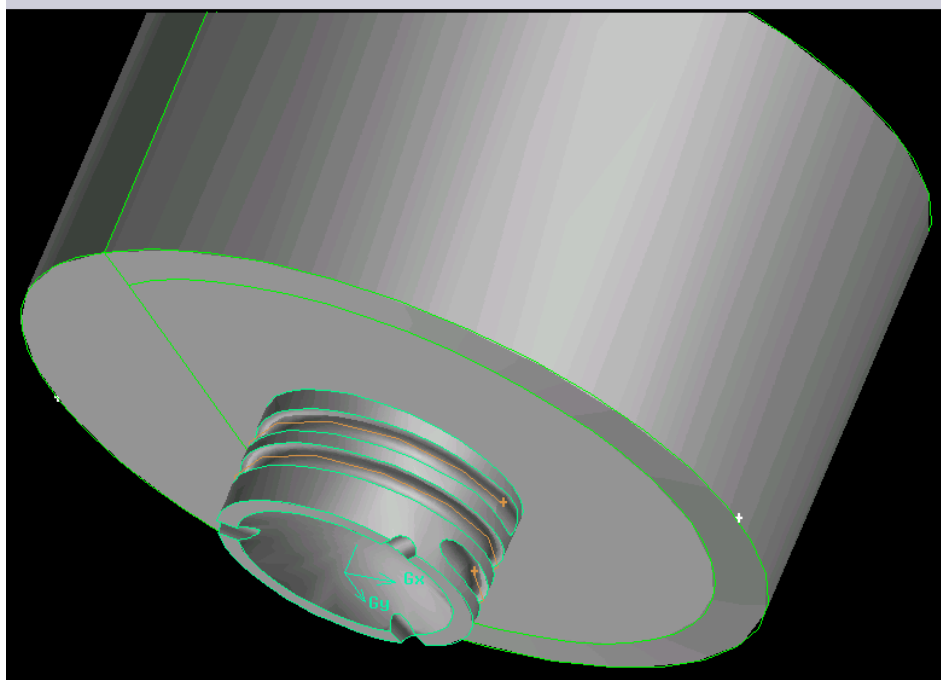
3D geometry of the tool pin created using Gambit. The tool is threaded, has 3 notches in a triangular orientation, and a cupped tip.
